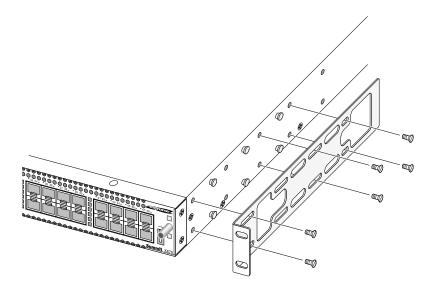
Attaching a Rack-mounting Bracket (X670 shown)
